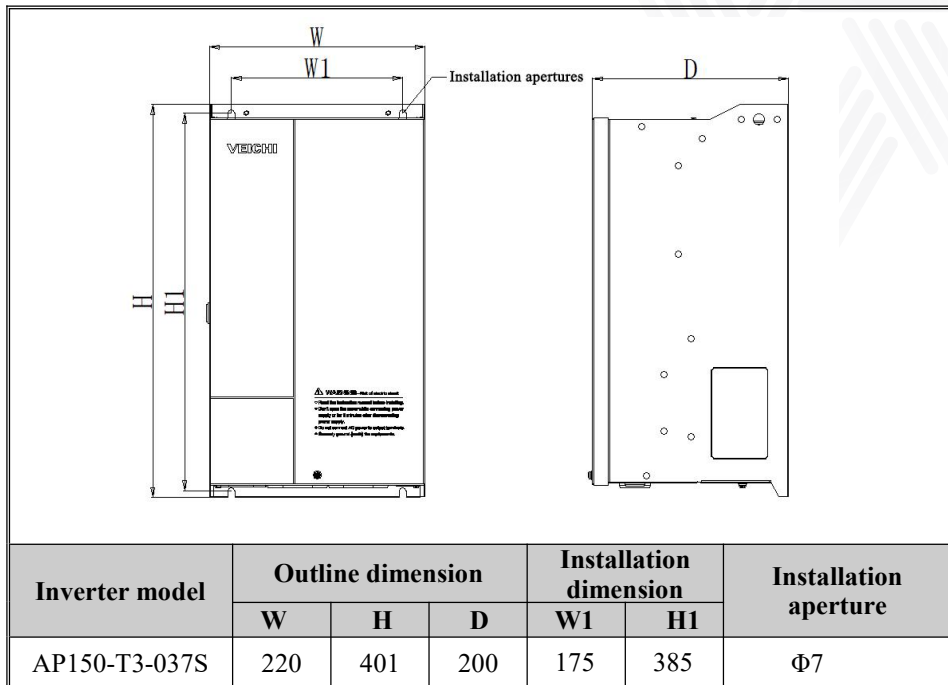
Wall - mounted outline and installation dimensions diagram
